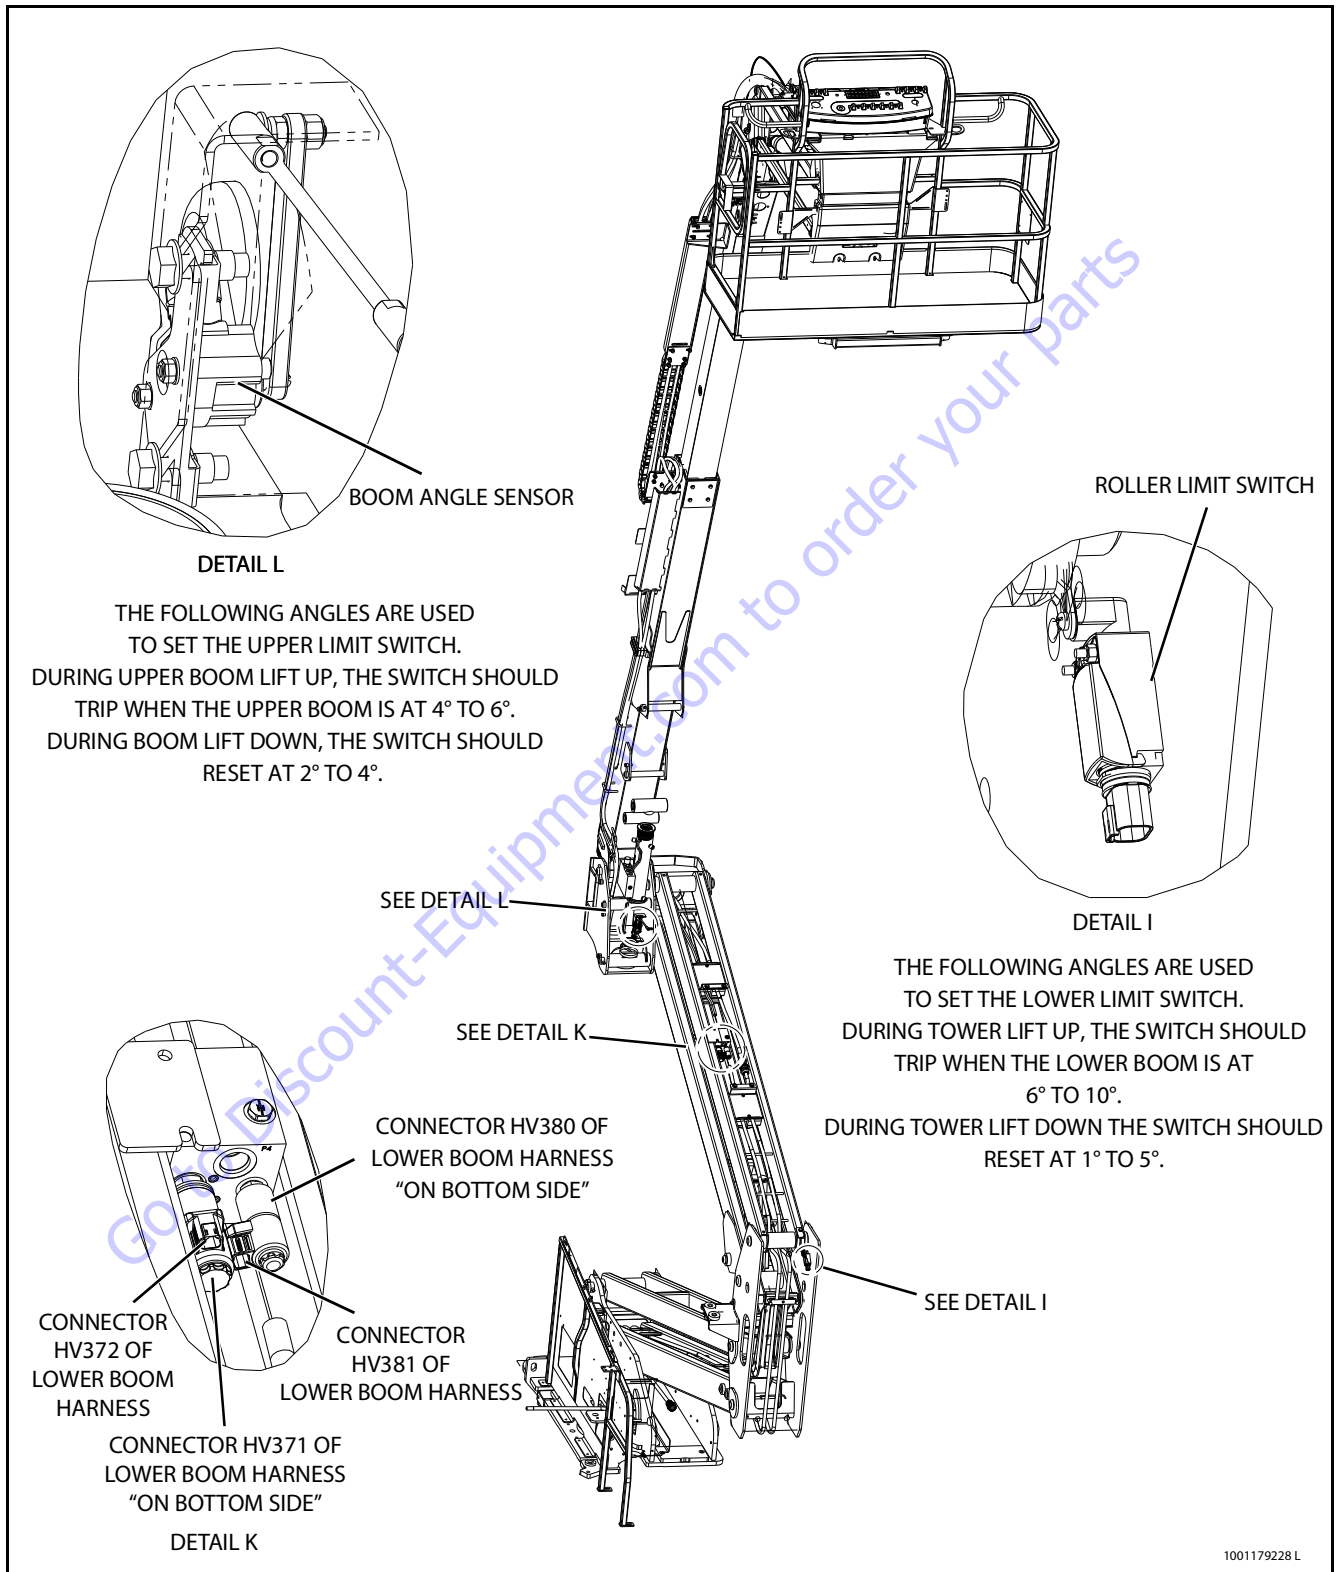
Cables and Clamps Installation - Sheet 3 of 8
